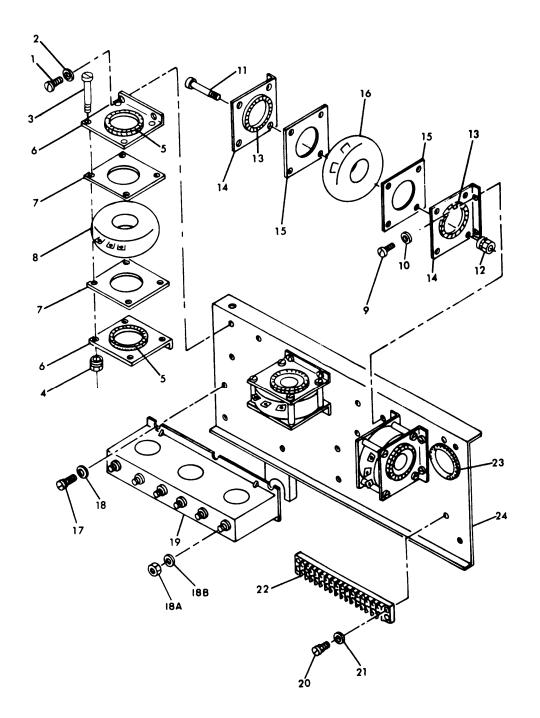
Current Transformer Assembly and Load Connecting Group Mounting Brackets
